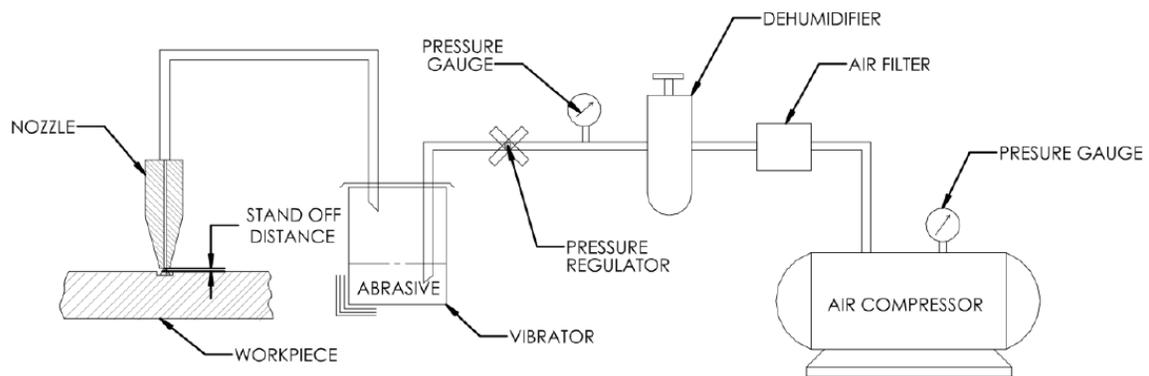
Schematic Layout Of Abrasive Jet Machine
